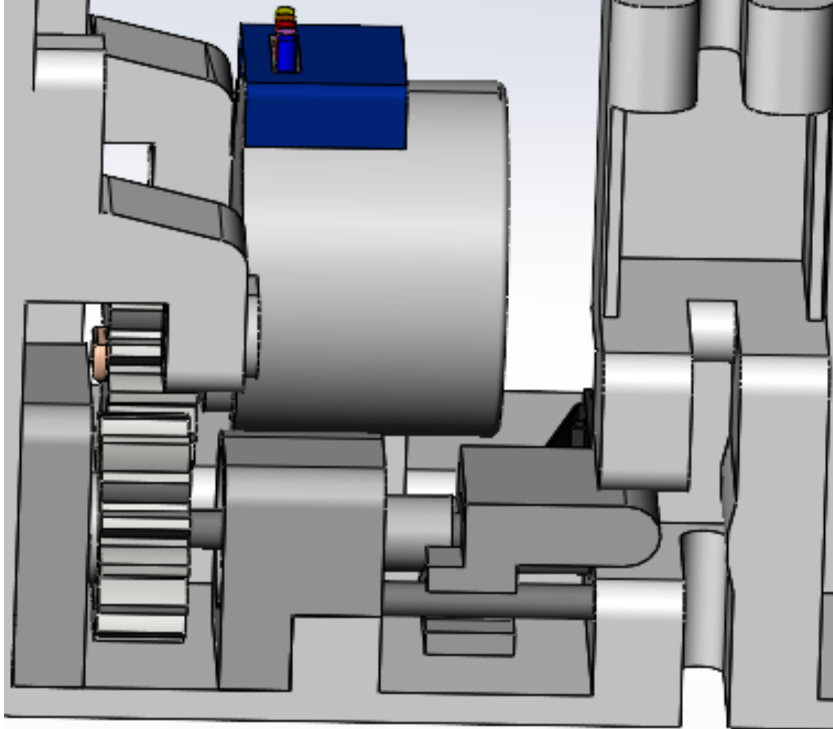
SolidWorks drawing of iteration 4 of design reconfiguration
